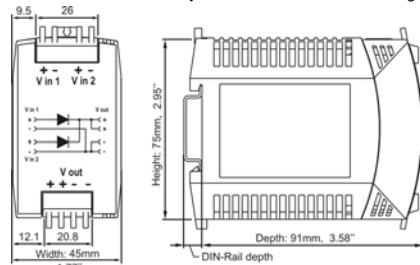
/ Bild 8 MLY10.241: Physical Dimensions / Abmessungen (mm)
